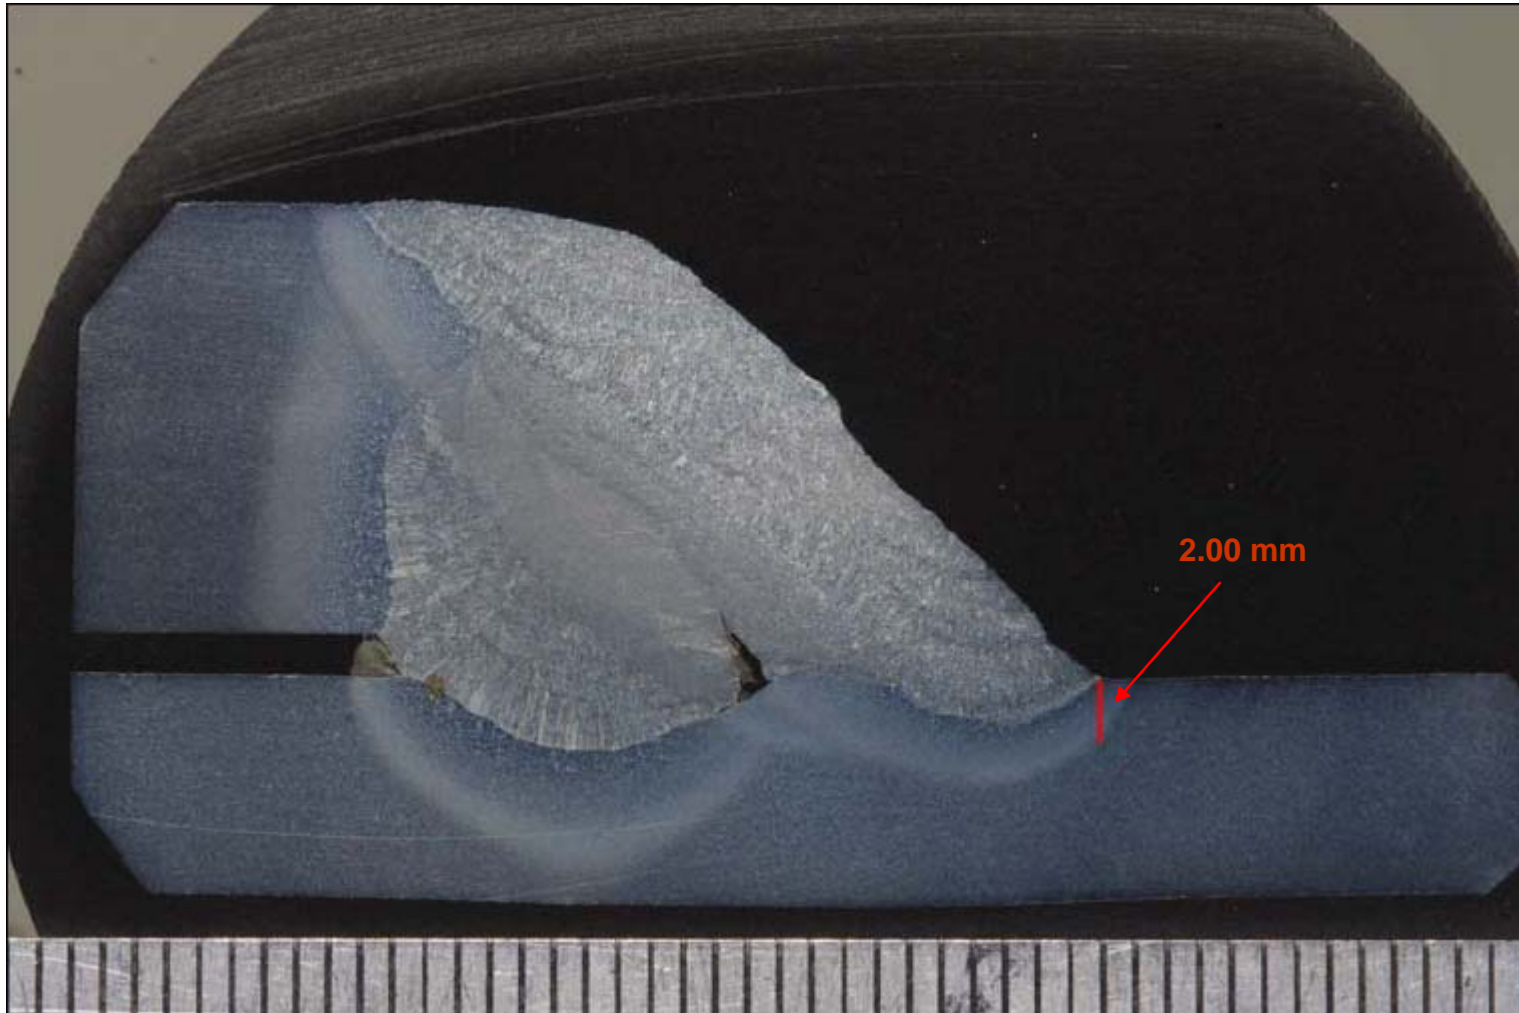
Fillet Weld Section and HAZ Depth at 10:00 Position
